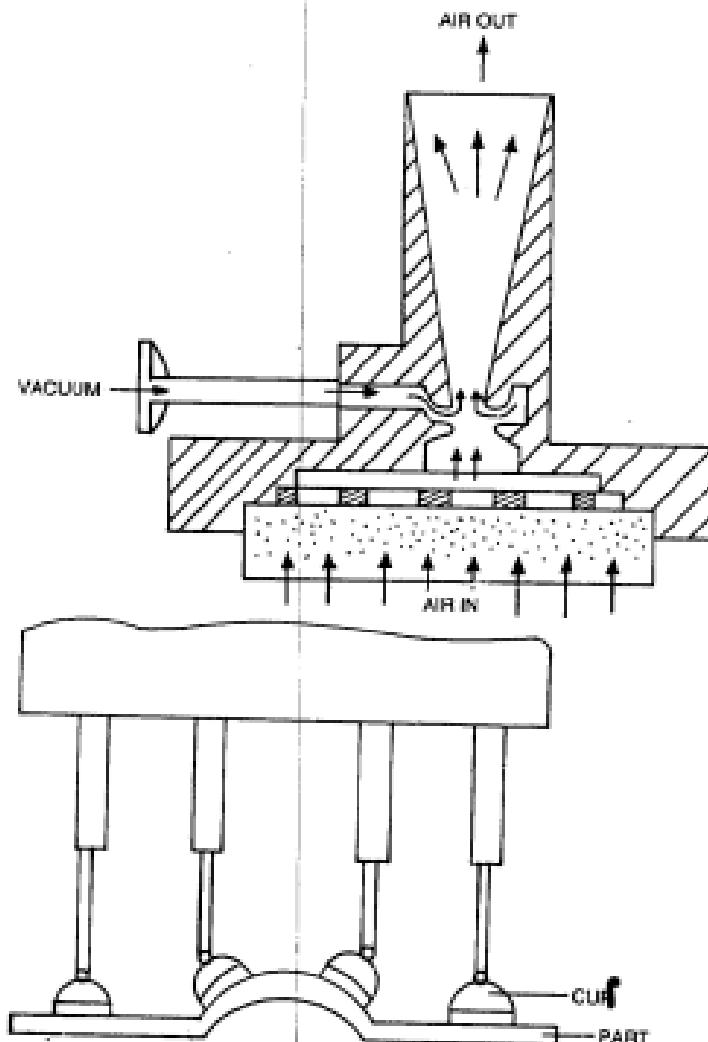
Vacuum gripper (a) Venturi device for flat surface gripping
